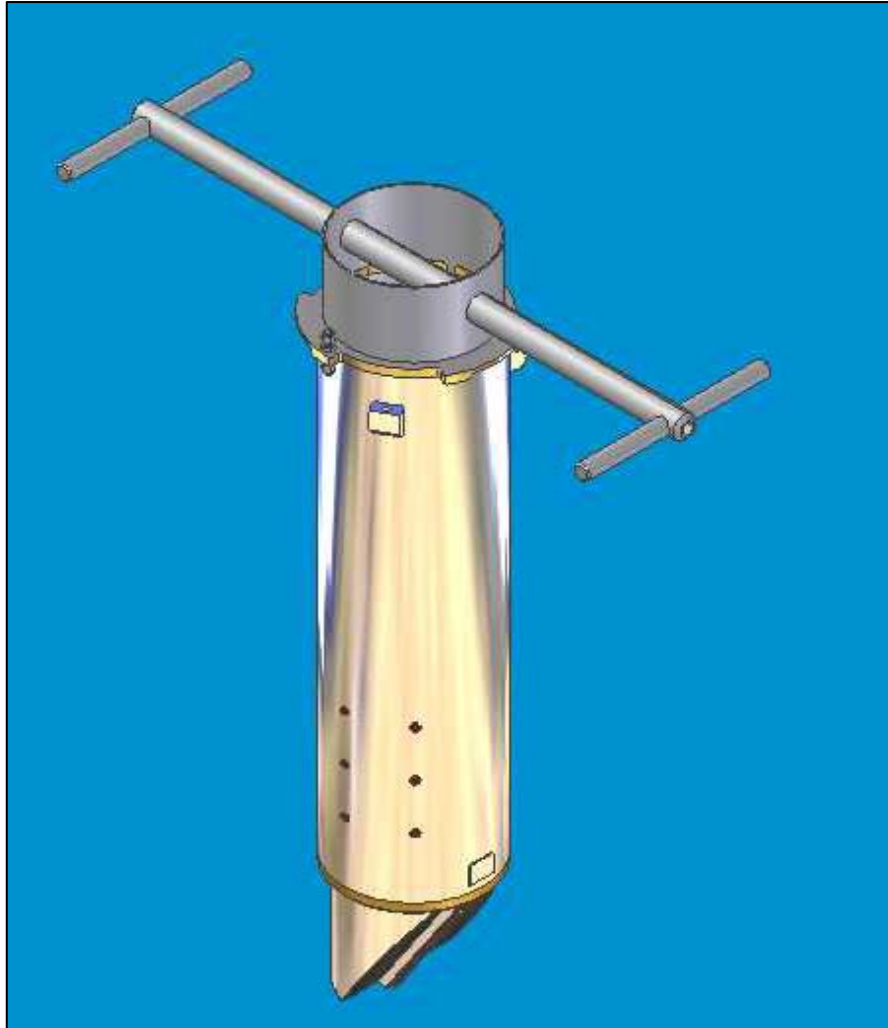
Gasifier scanner assembly showing instrument and external mount in the inverted position, ready for measurements in the gasifier. Handles at the top allow insertion and extraction.
